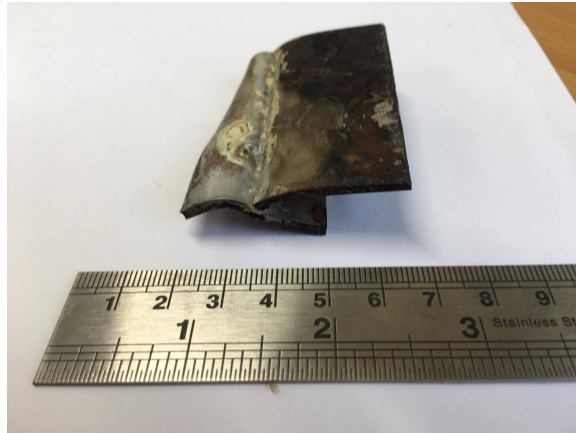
The mild steel T-joint from Fig. 2.2 after impact testing.
